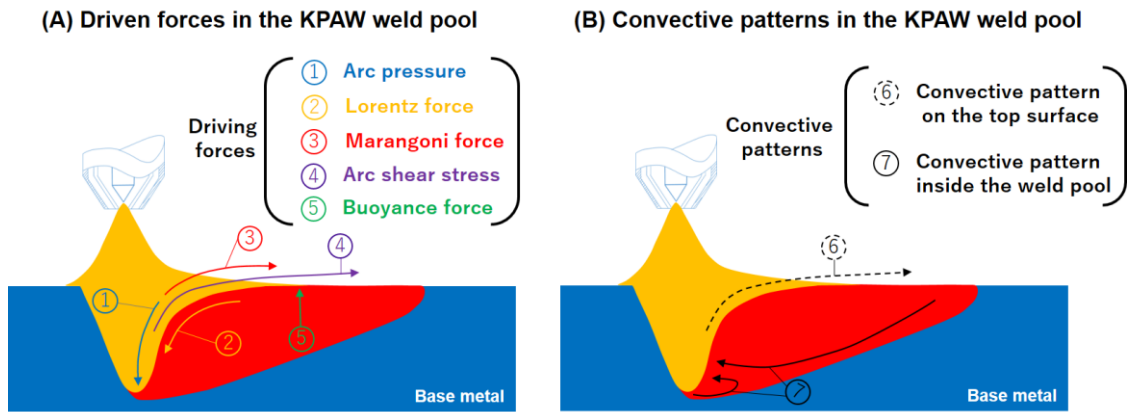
(A) The driven forces in the KPAW weld pool; (B) The convective patterns in the KPAW weld pool
